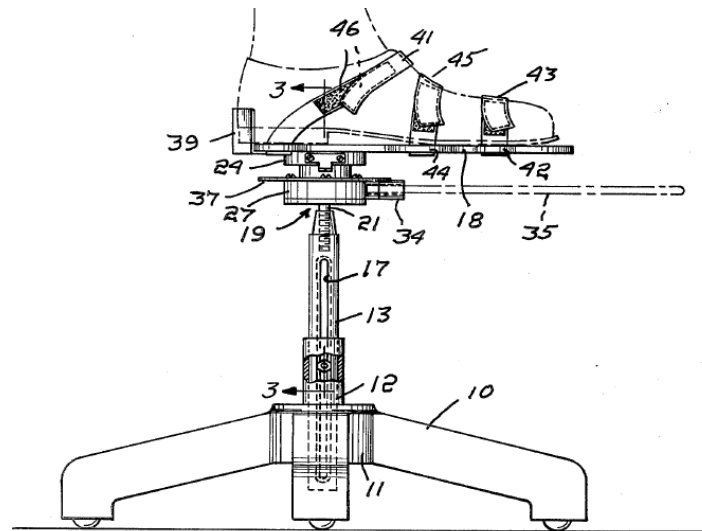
33. Exerciser for lower leg, ankle, and foot muscles[53]
